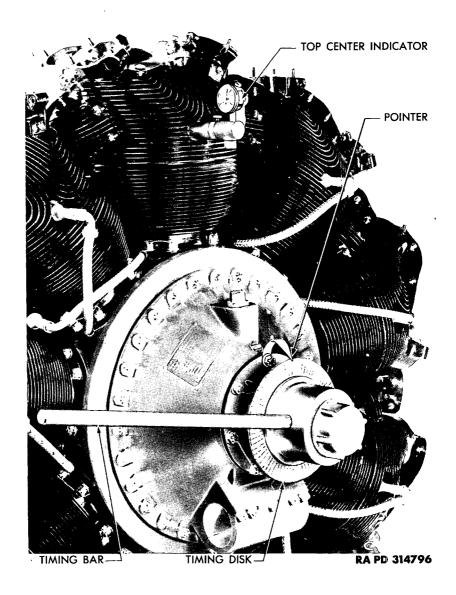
Timing Engine Using Indicator 41-I-73-100 and Fixture 41-F-2997-84
